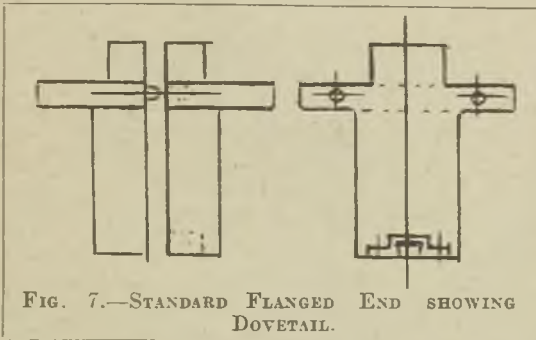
STANDARD FLANGED END SHOWING DOVETAIL.
